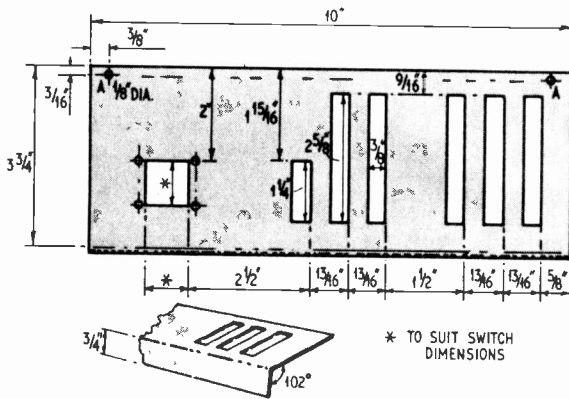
The cutting and drilling details of the keyboard panel which is made from an extra front panel. All flanges should be sawn off except one long edge which is bent as shown in the smaller diagram
